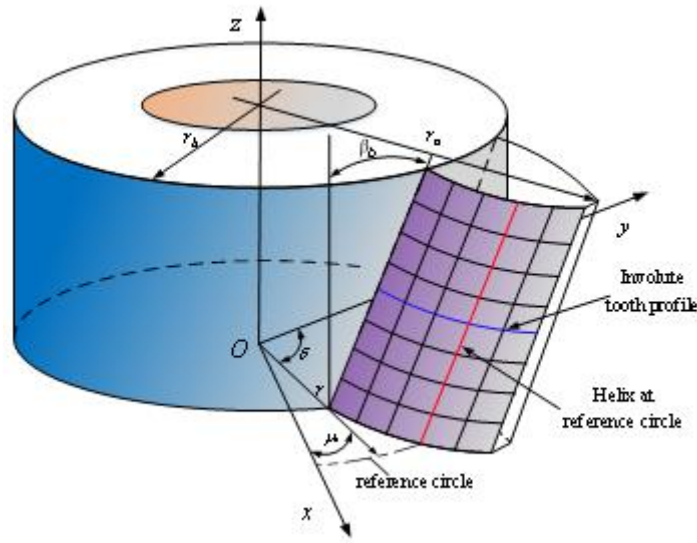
Tooth flank formed by the family of helical lines and involutes.
